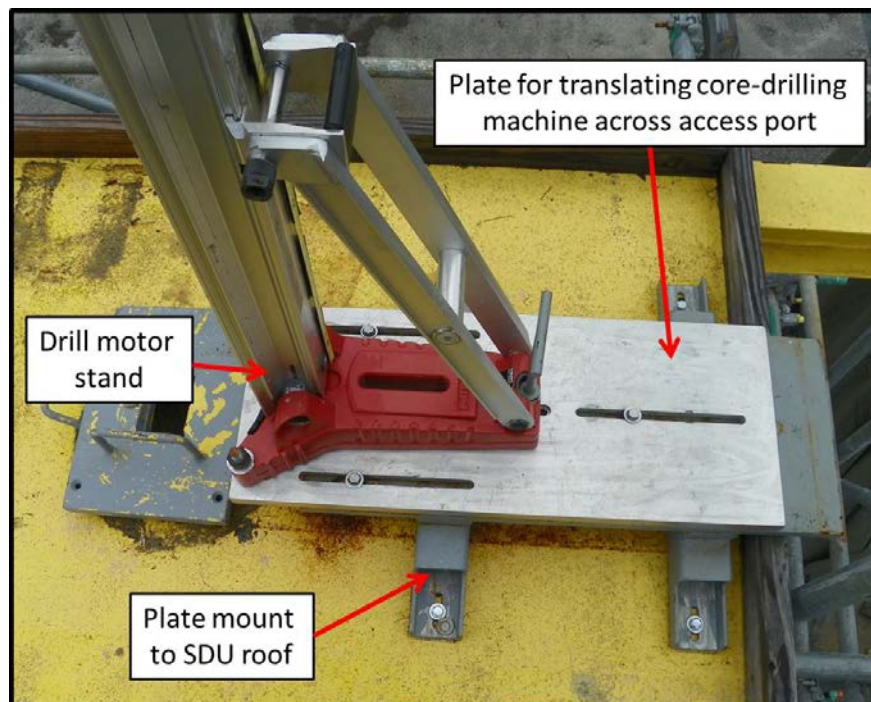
Photo of bracket to be utilized for securing the drill stand to the SDU roof.
